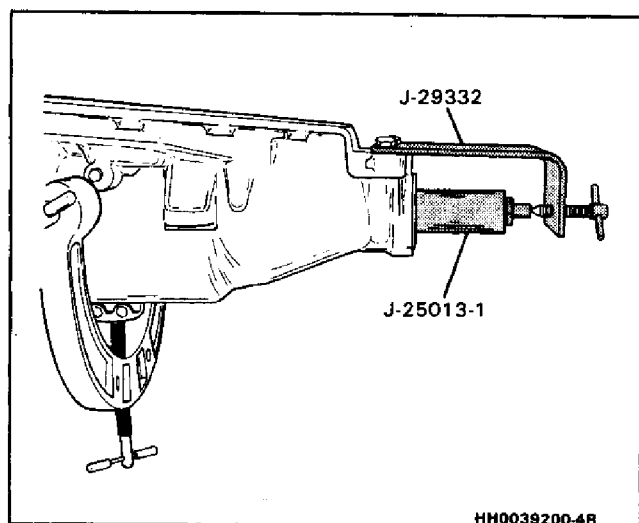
Installing Output Shaft and Rear Unit Support Fixture
